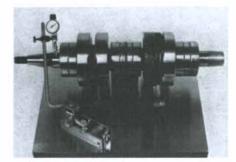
Crankshaft runout should not exceed 0.002 inch (0.05 mm) when measured as shown.
